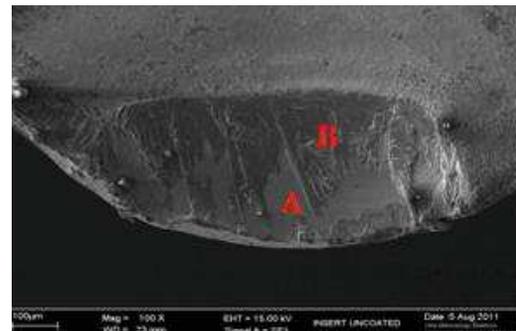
Crater wear on the top rake face of the tool; A) smooth wear area due to diffusion mechanism; B) melted titanium alloy.
